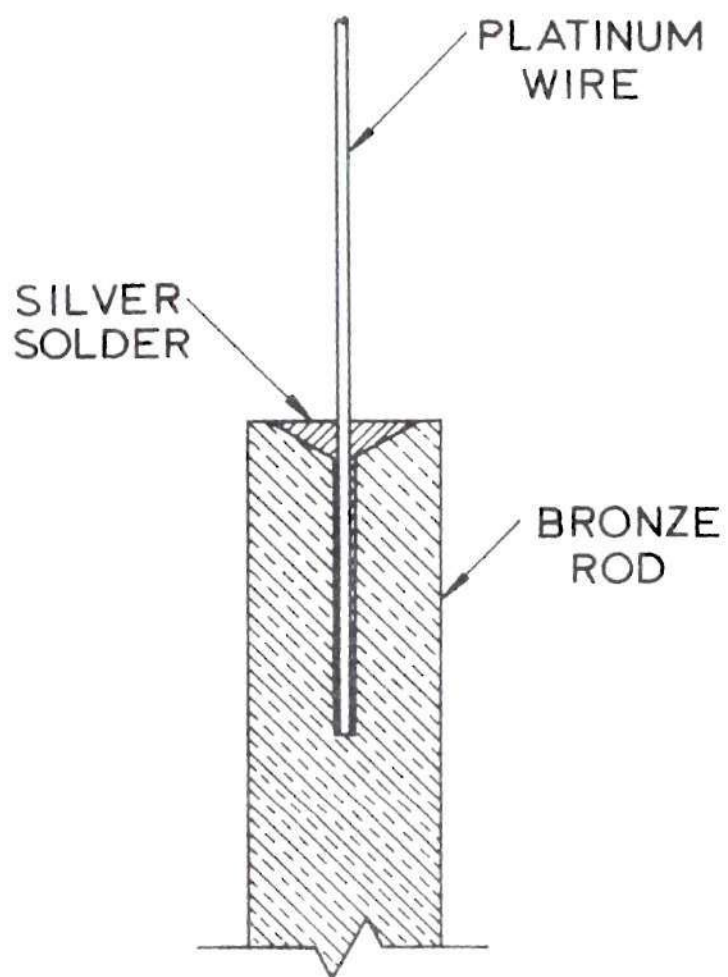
Heater Wire Design - Silver Soldered to Holder.
